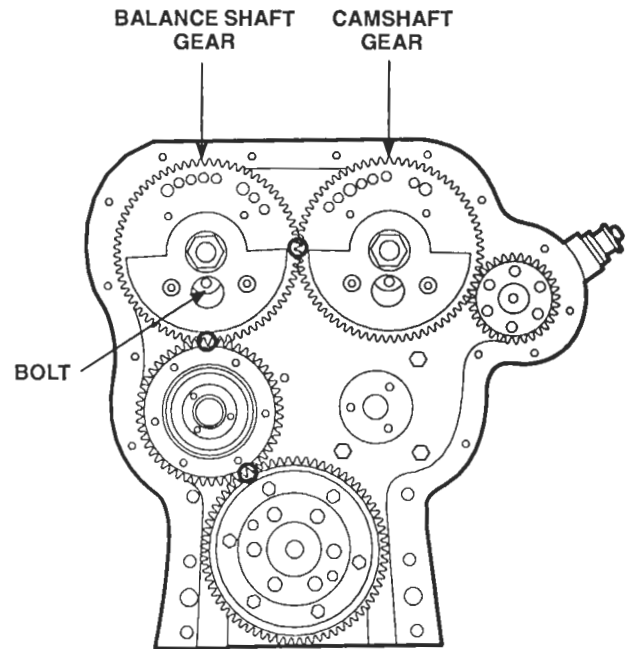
Removing or Installing Shaft Bearing Retainer Bolts
